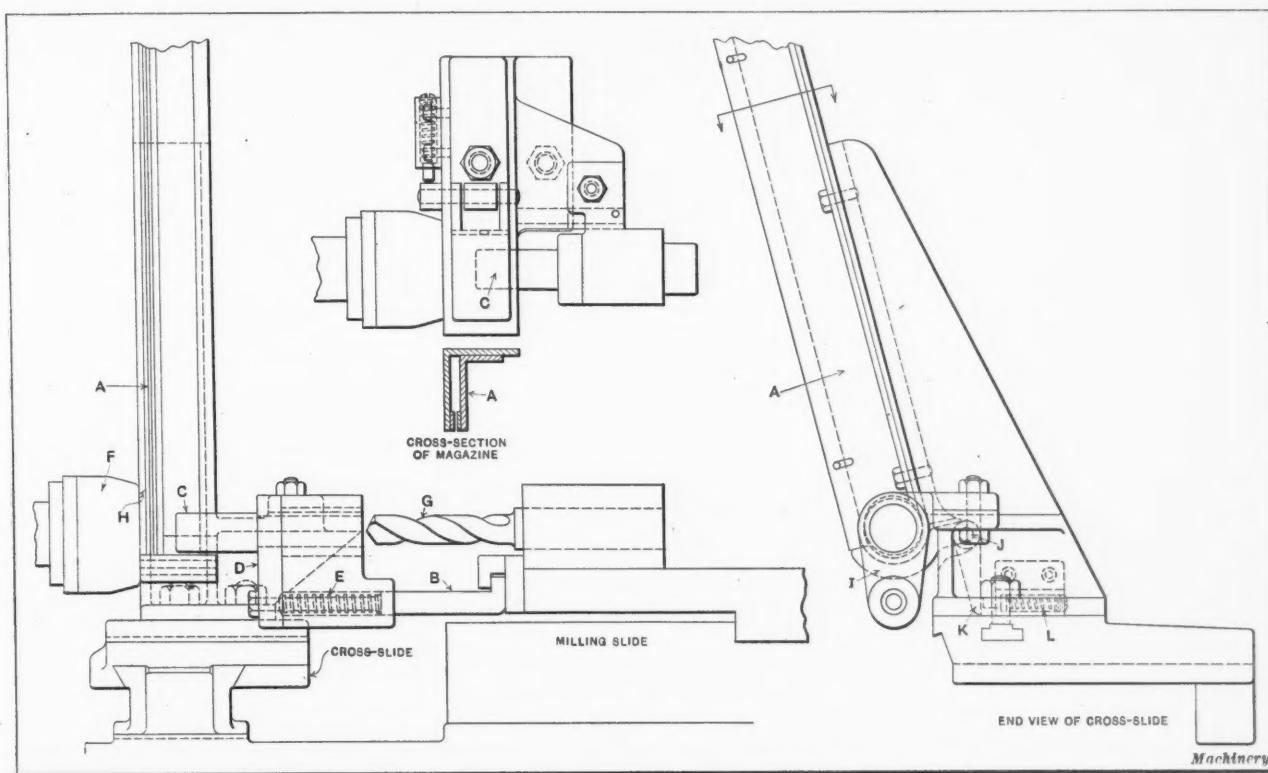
Feeding Mechanism mounted on the Cross-slide of a Seven-eighth-inch Automatic Screw Machine used for drilling Holes in Fiber Disks
